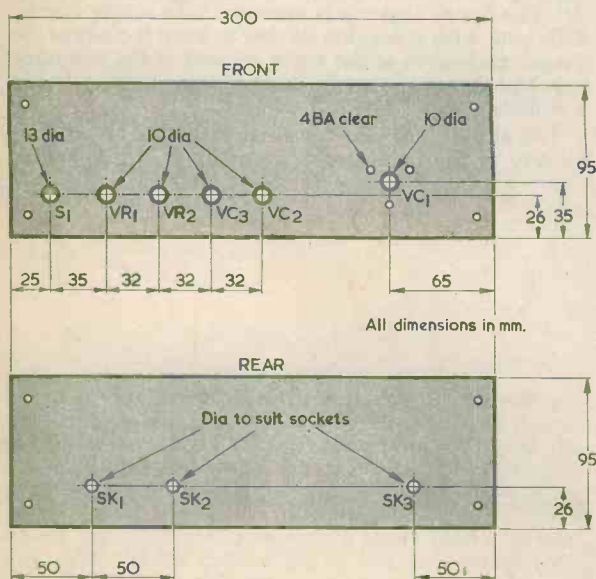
Dimensions and drilling details for the front and rear panels. The material is aluminium sheet
